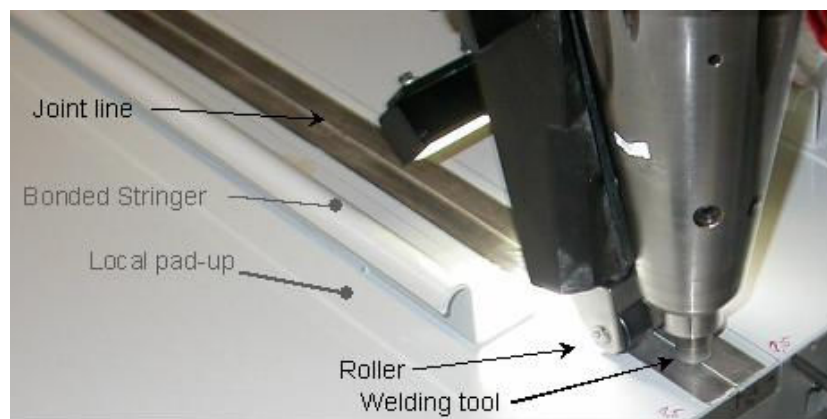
Welding of panel with bonded stiffeners (concept 2)
